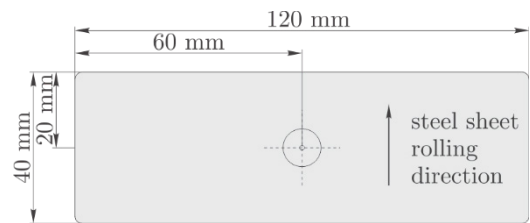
Specimen used for blanking experiments with the indicated circular blanking shape
